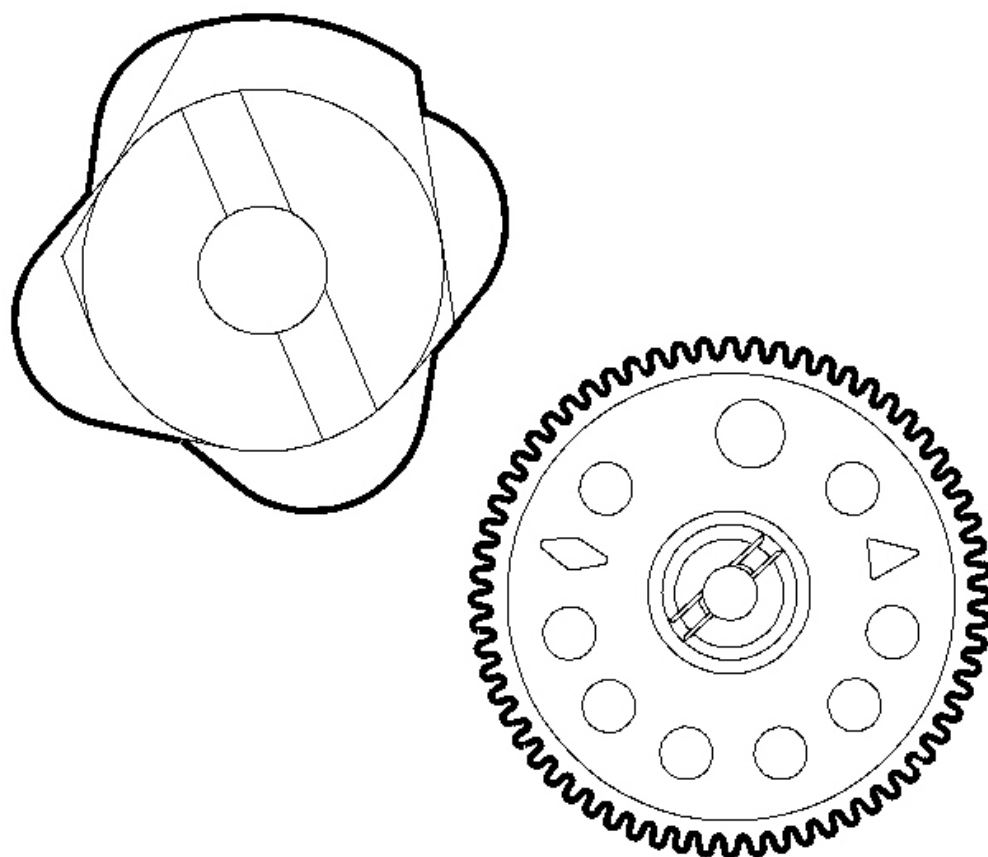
Aligning Camshaft Slot In Line With The Notch On The Sprockets
